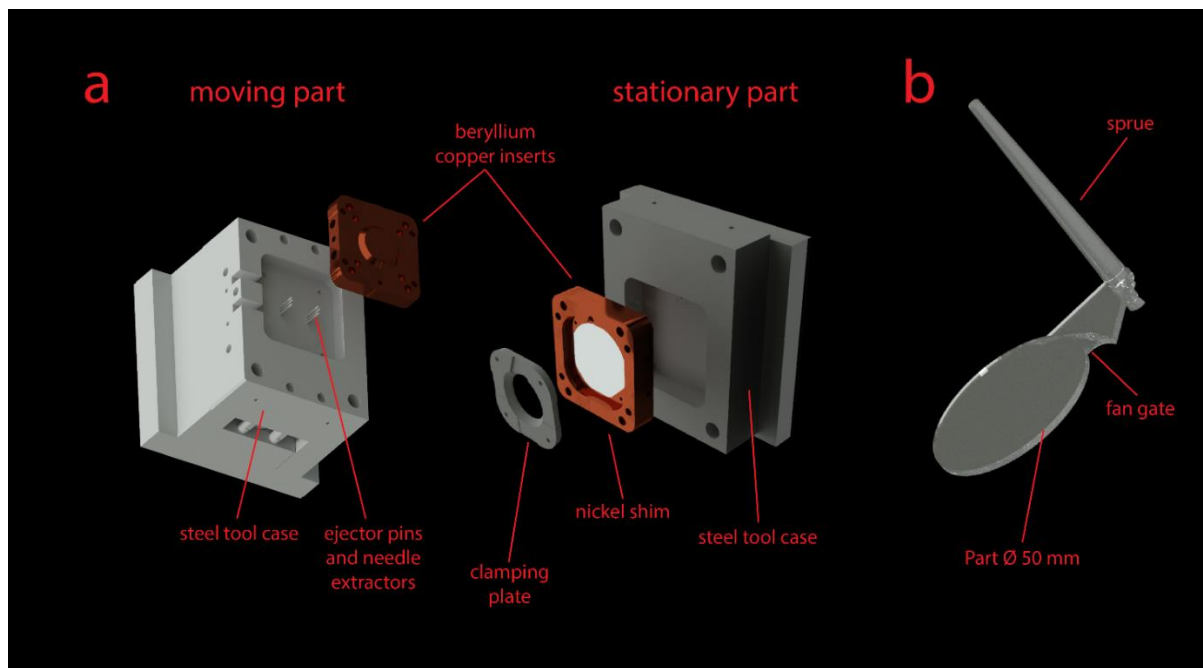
CAD drawing of tool, a) The beryllium copper inserts for the stationary and moving tool parts. Note, how the shim is mounted by the clamping plate, b) Circular disc polymer part with sprue (inlet) and fan gate.
